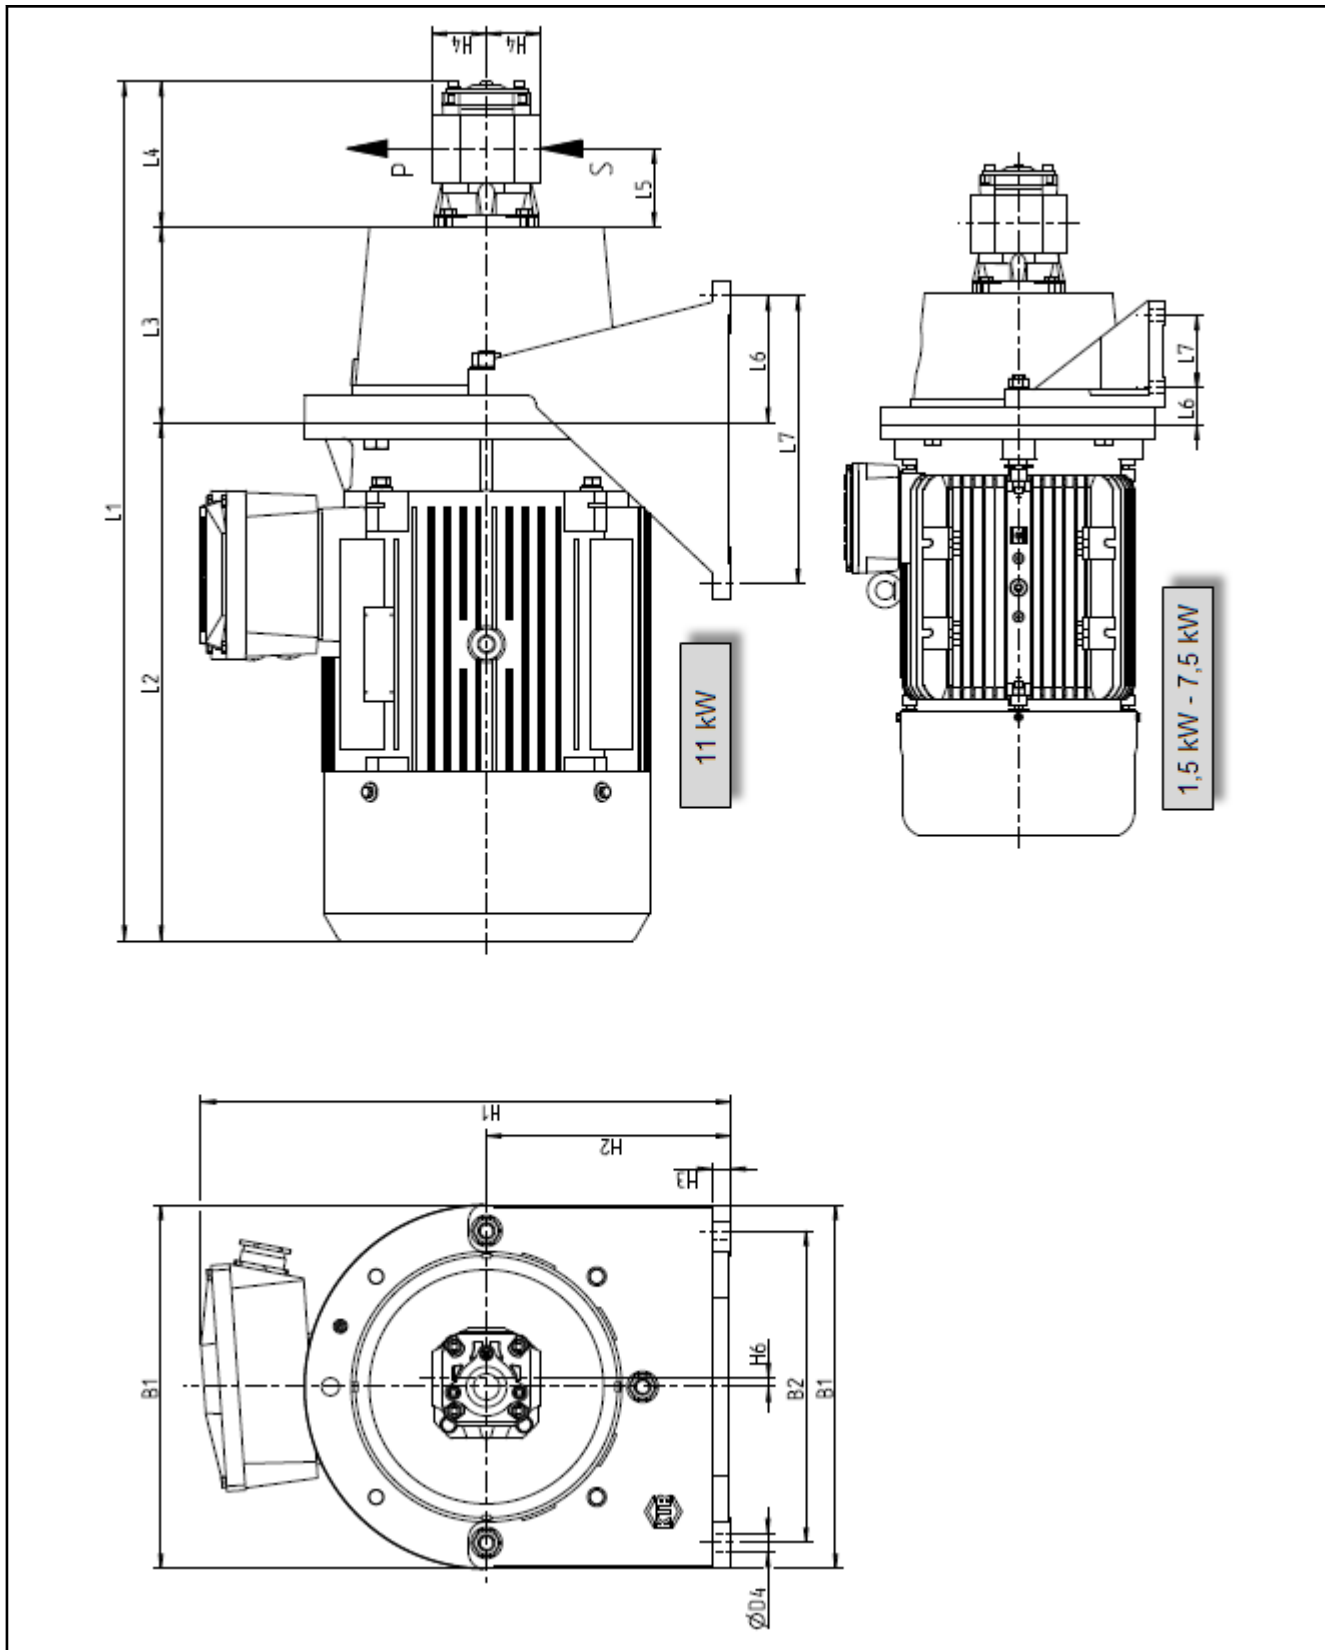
Dimension sheet "MPES2" with "PGF2" in the fastening mode "B" (horizontal foot fastening)
